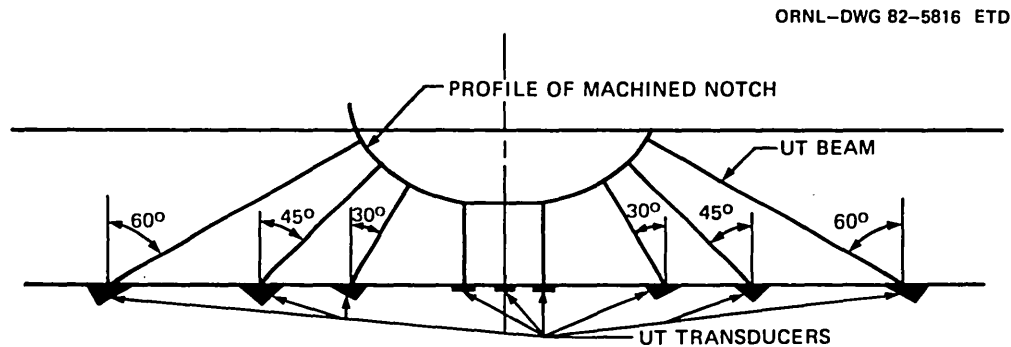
Profile of the V-8A machined notch with locations of ultrasonic transducers used to measure fatigue crack growth.
